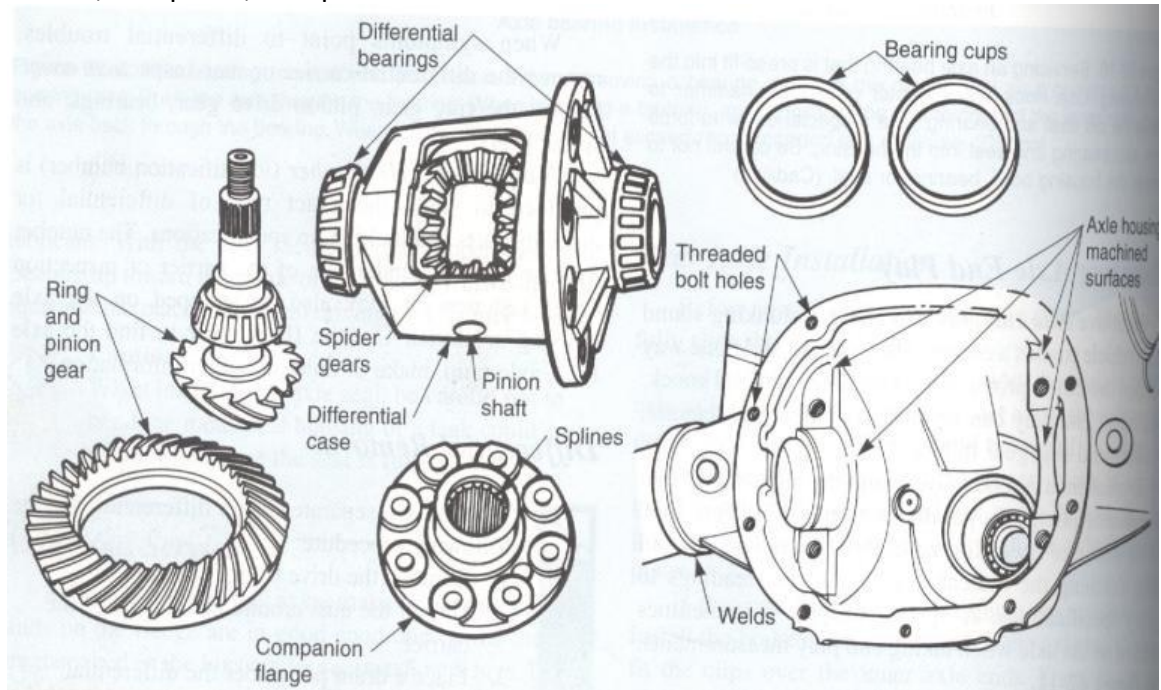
Inspect all differential components carefully. If you overlook even one bad part, your repair could fail.
